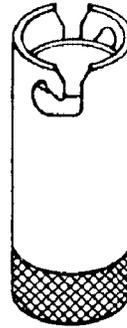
Respirator Assembly Test Set - A/E47T-28
